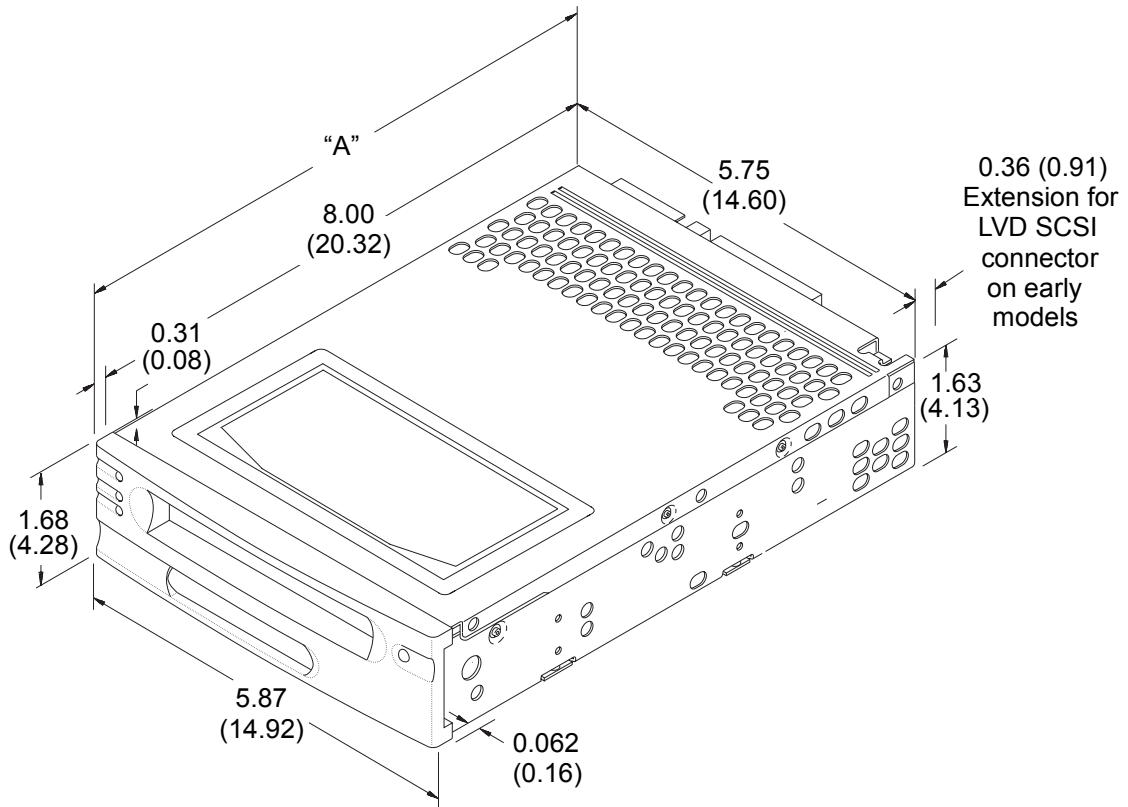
Dimensions of the internal tape drive in inches (and centimeters)
